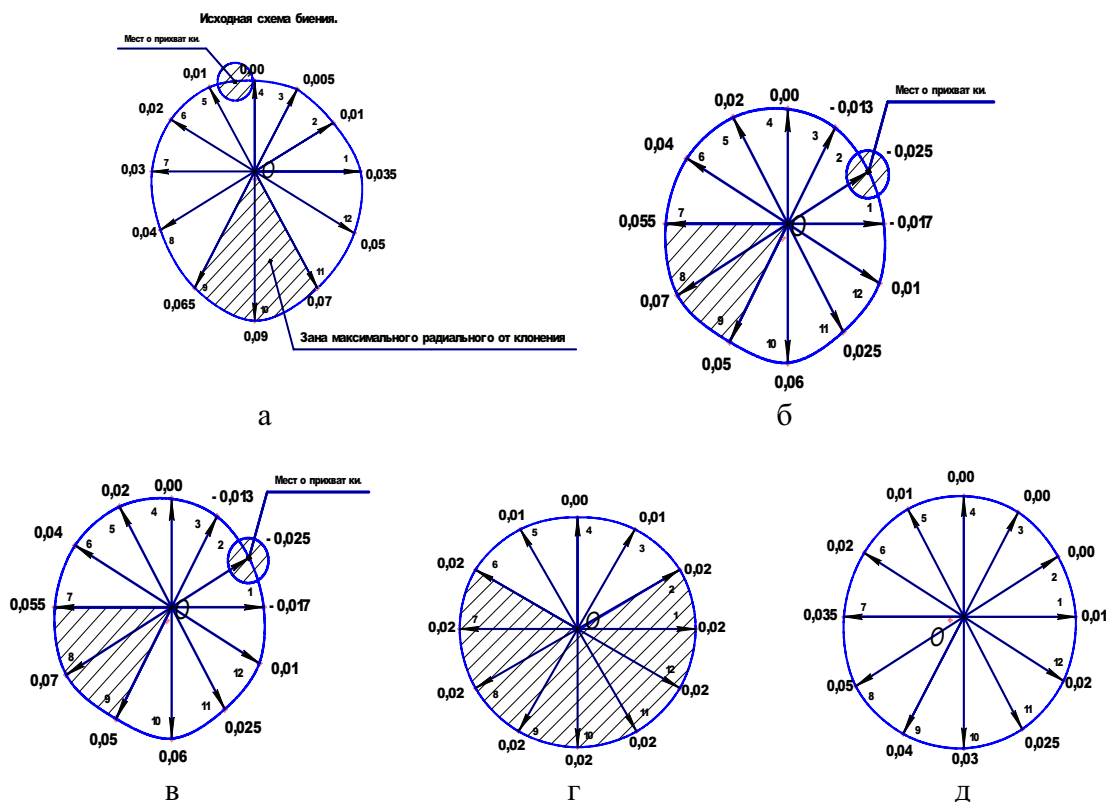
Radial deviation of connection components depending on tack position. Quality of connection: a) achieved at the final stage of the first step; b-d) achieved at preliminary stage of welding second step; e) after welding
